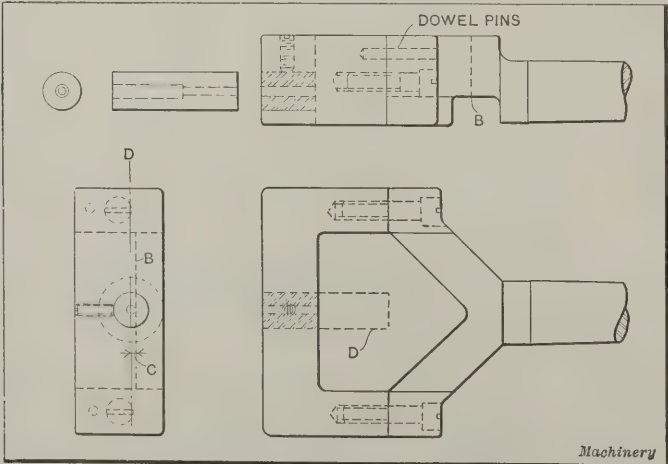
Jig used for drilling Holes close to Shoulders in Screws
